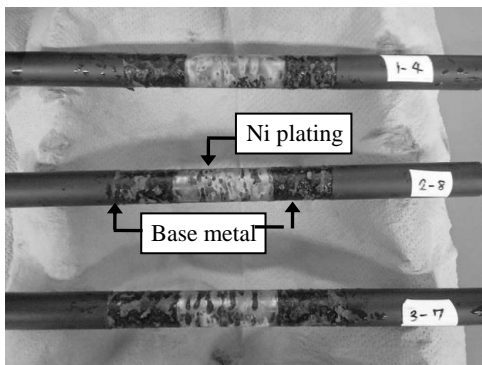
Photograph of cylindrical shafts after CASS test (48hours)
